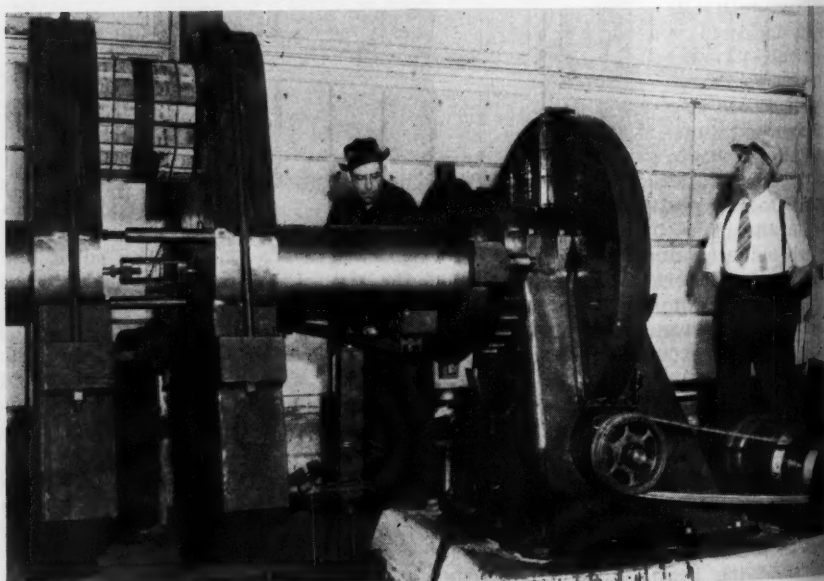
Machinist Taps the High End of a 8,500 h. p. steam turbine, using a 3-inch Geometric collapsible tap for the job. Such a tap eliminates possible damage to the thread, since it can be withdrawn without having to back it out as is the case with solid taps. The
